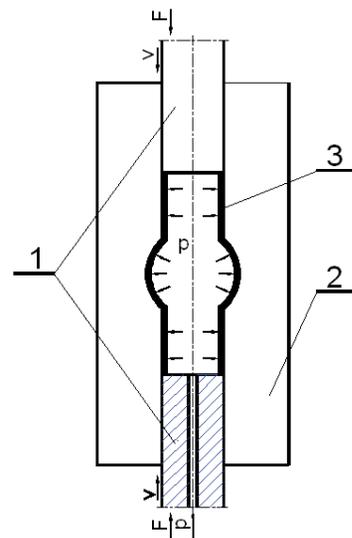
Hydromechanical bulge forming of axisymmetric component, where: 1 – punches, 2 – die, 3 – component
